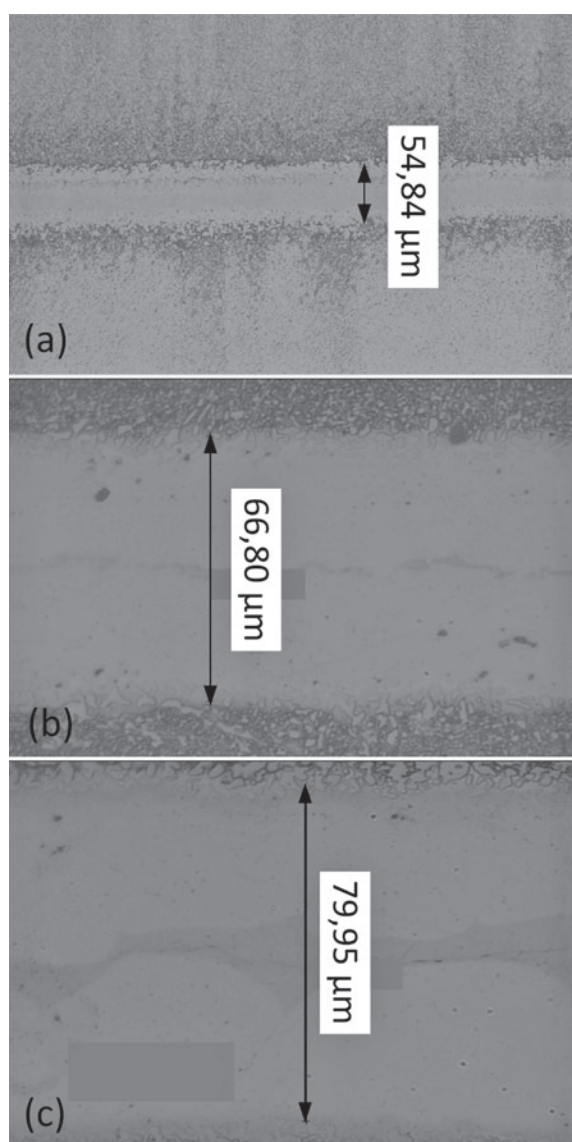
Macro sections of brazed joints according to the Table 2, (a) Specimen 1, (b) Specimen 2, and (c) Specimen 3.
